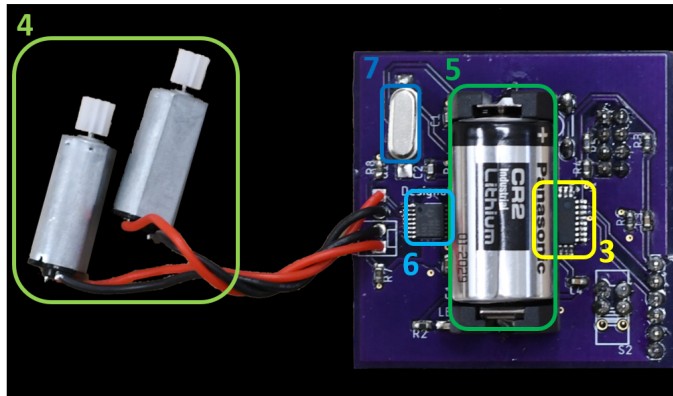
Bottom view of the circuit board: 3) Microcontroller unit ATmega328P, 4) DC Motors, 5) CR2 battery, 6) DRV8833 dual H-bridge motor driver, 7) 8M oscillator.
